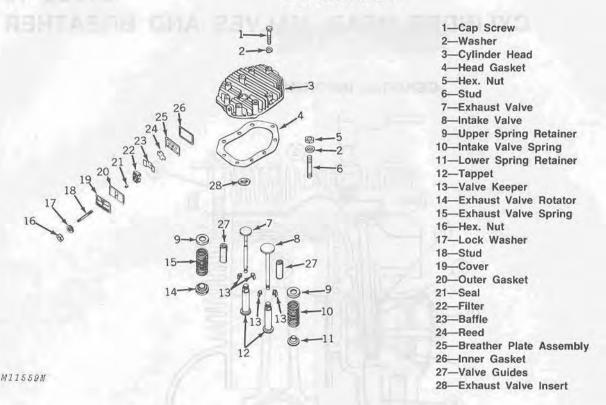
Exploded View of Cylinder Head, Valves, and Breather (210, 212 and 214 Tractors)
